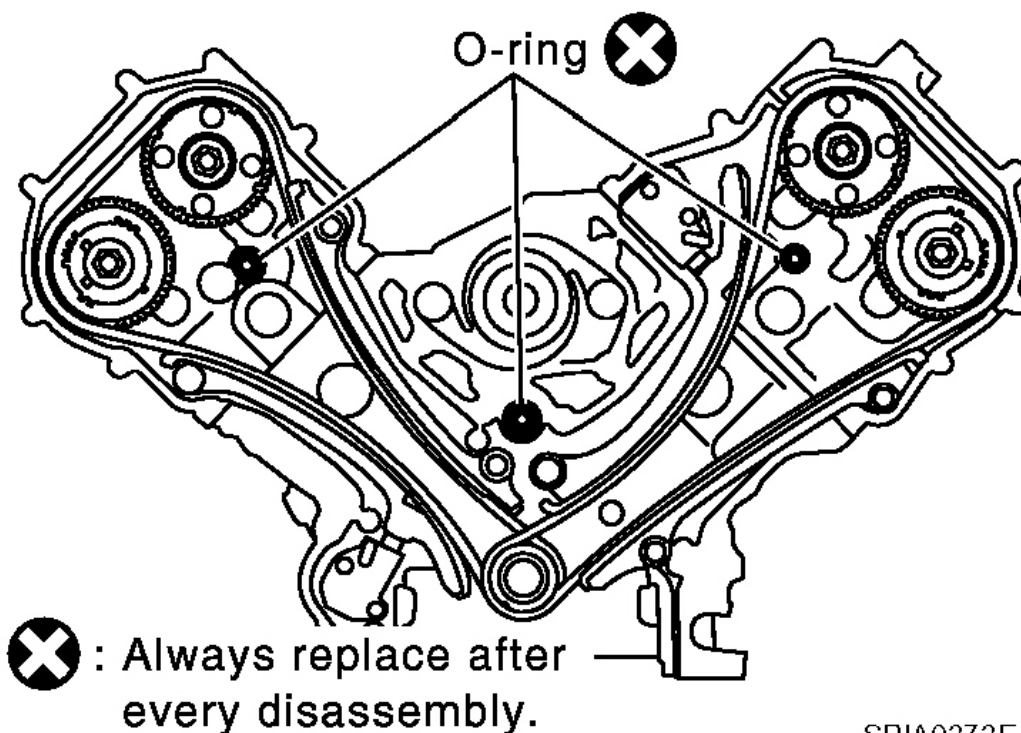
Identifying Chain Tensioner Cover To Front Cover
